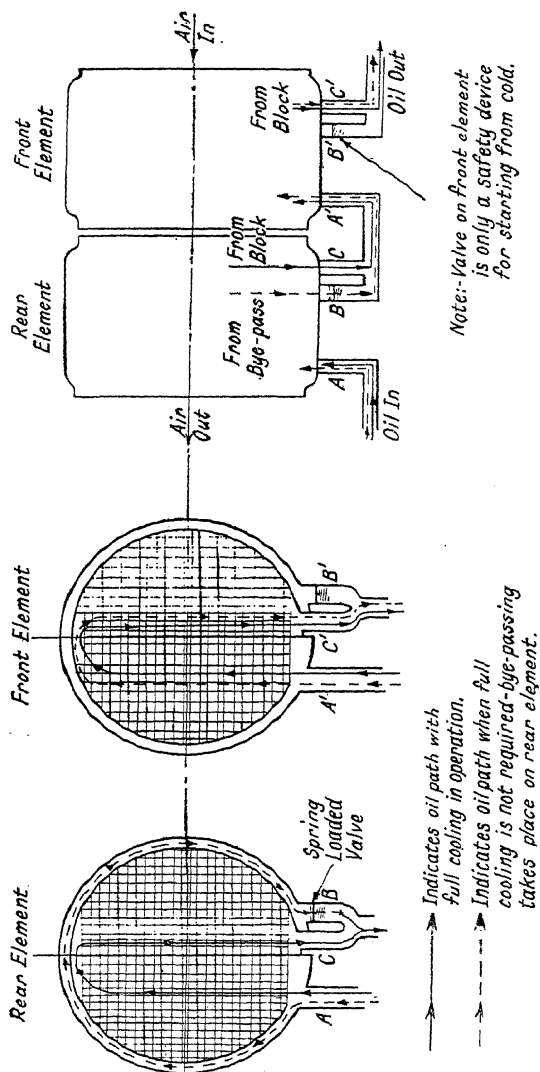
Diagrams showing operation of Marston R.A.E. type oil cooler.
